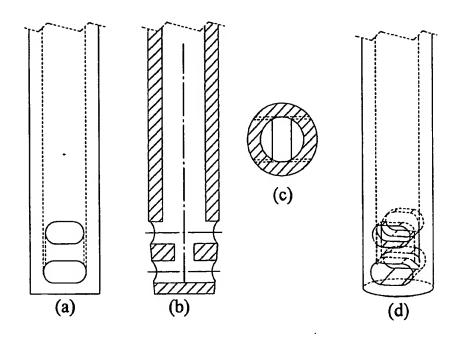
Views of a First Embodiment of a Casting Nozzle of the Invention
